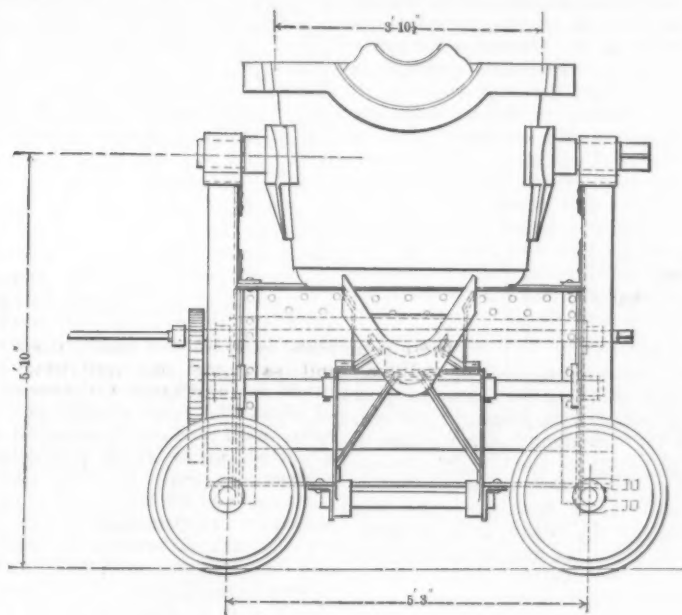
Ladle and Car for Charging O. H. Furnace.
